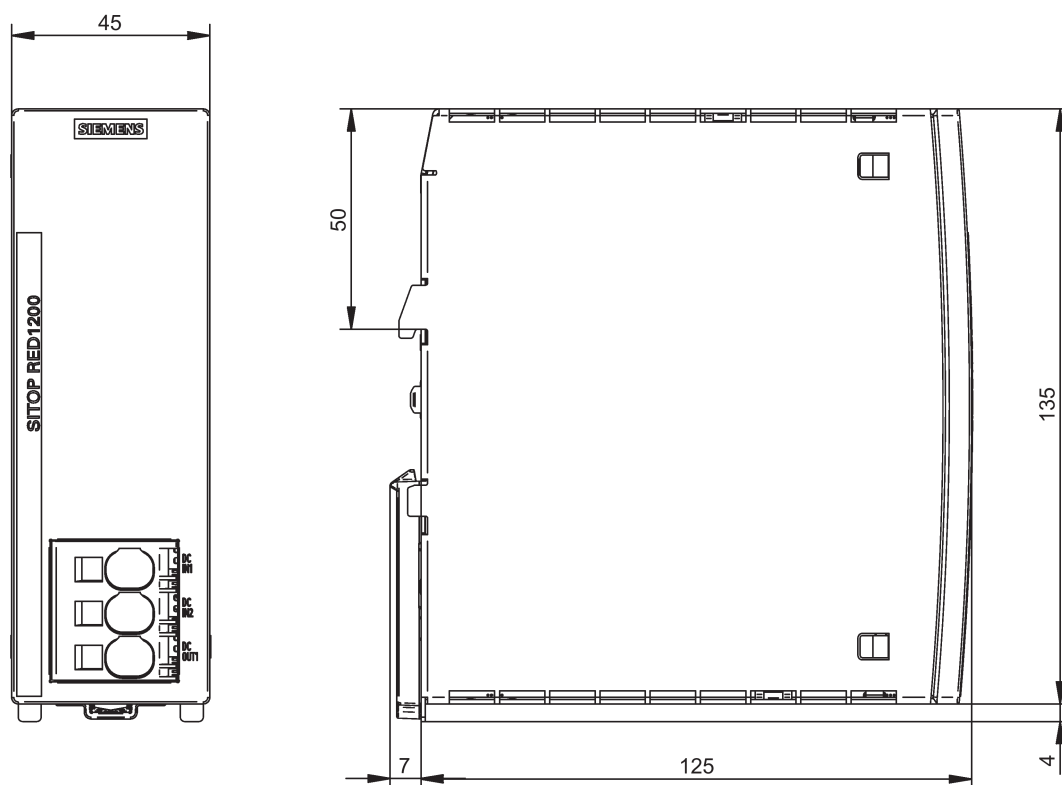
Dimension drawing 6EP4347-7RB00-0AX0 and 6EP4347-7RC00-0AX0
